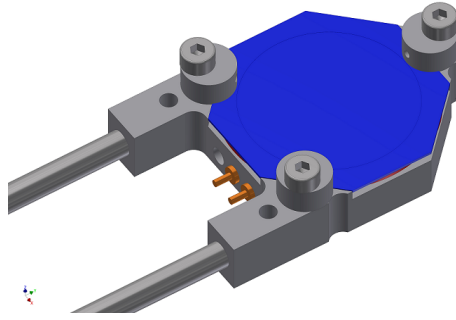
CAD drawing of the final design of the mount for the PIPS
